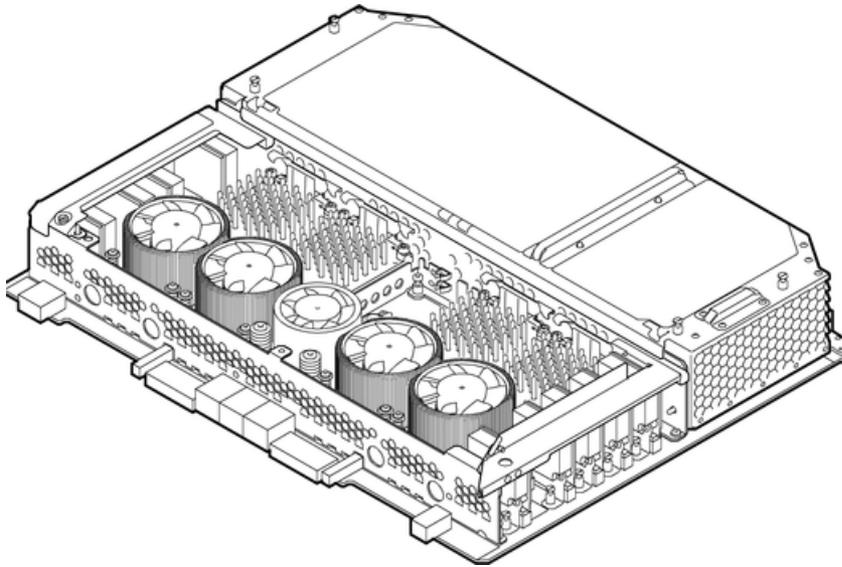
VRM Cover, Door Opener and DIMM Cover Installed
